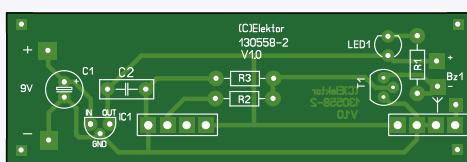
The receiver circuit board also contains few components, but has an elongated shape because of the dimensions of the receiver module.
